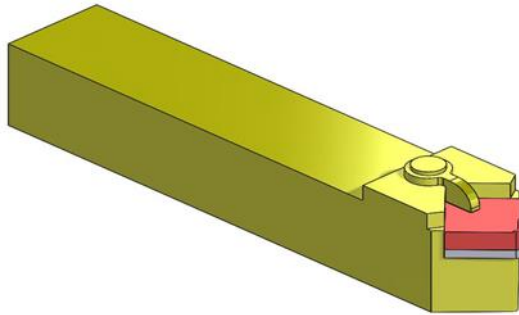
Three dimensional model of the geometry of insert and cutting holder.
